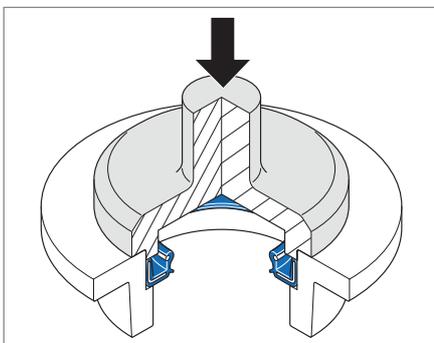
Installation with hydraulic or pneumatic assembly press. Diameter of metal tool face 5 mm to 10 mm (0.2 in to 0.4 in) larger than seal outside diameter (d2)
